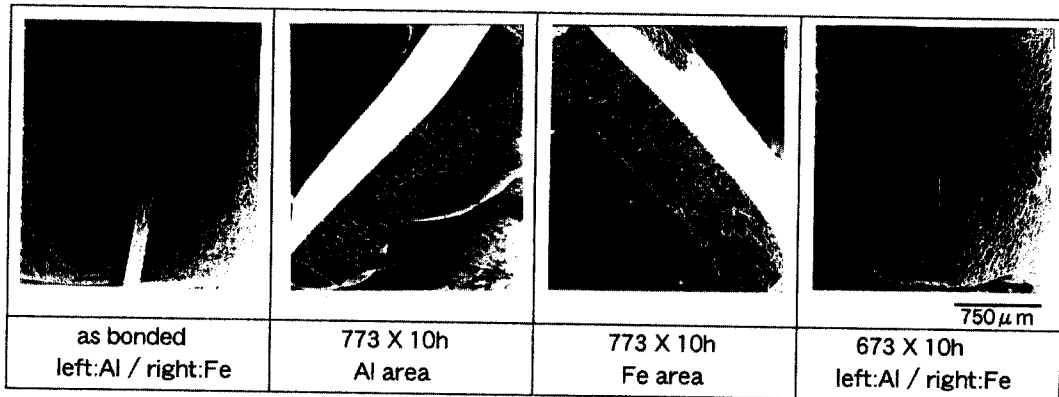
The fracture surface after the triple bending test of upset welding test specimen(Fe-sintered material and AC4C) observed by optical microscope.
